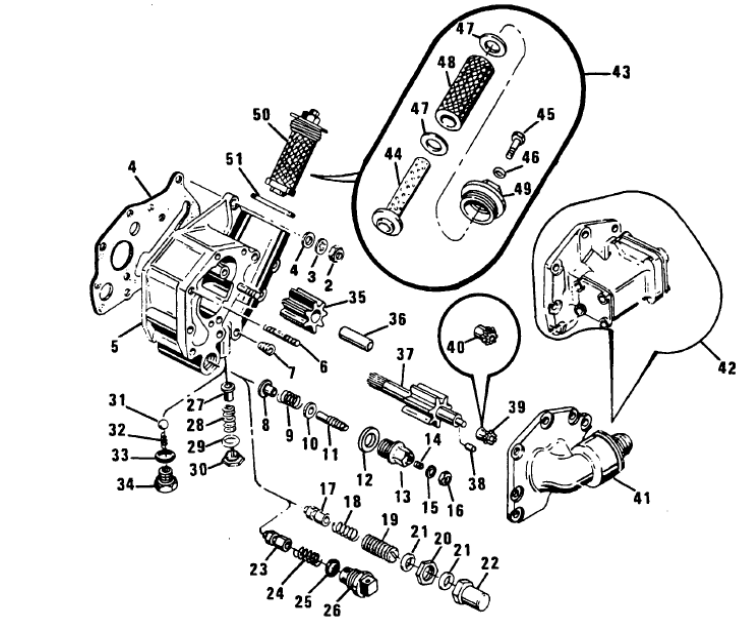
OIL PUMP ASSEMBLY
